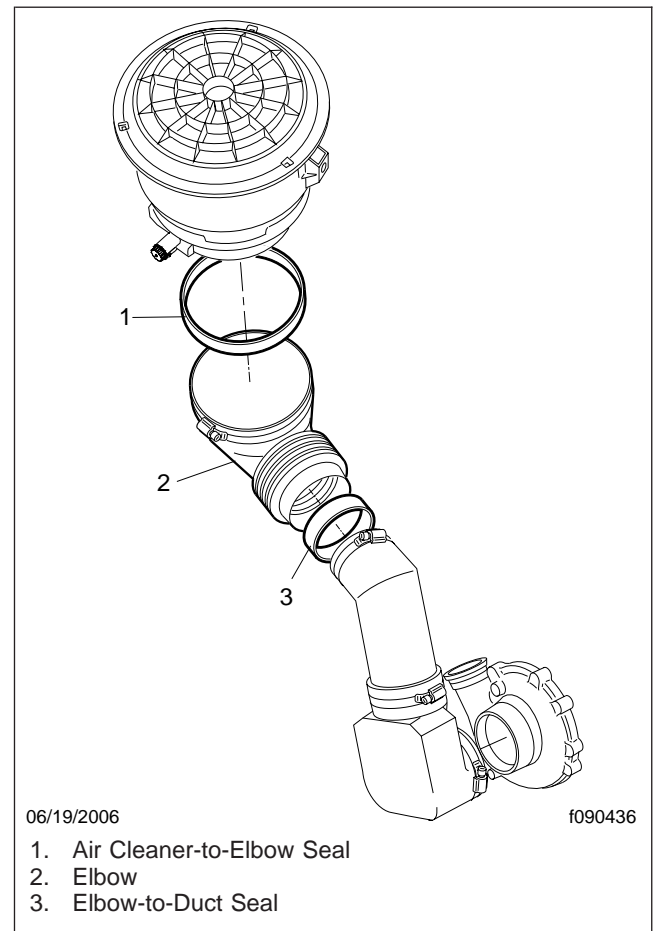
, Typical Elbow-to-Duct Configuration (MBE906 engine shown)
